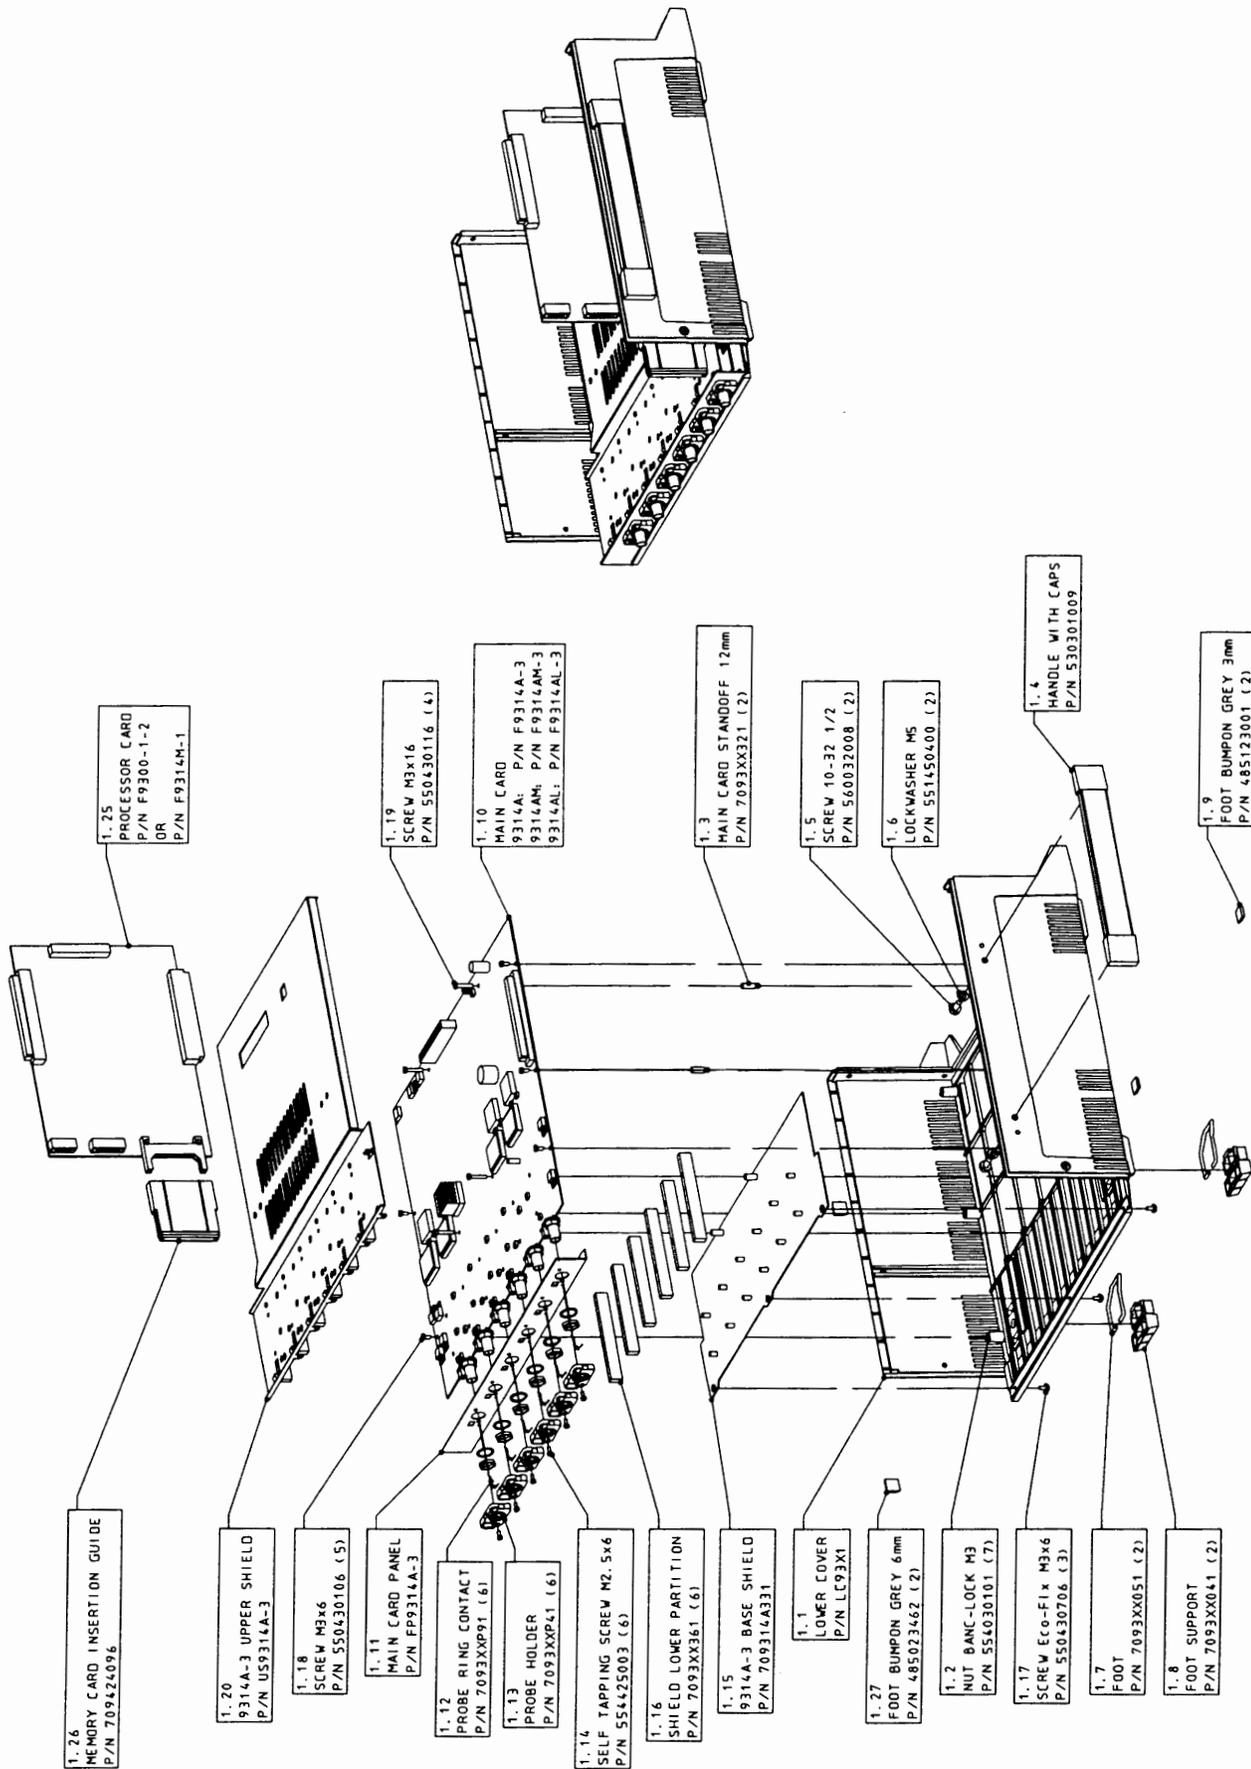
9314A/M/L Lower Cover Assembly
